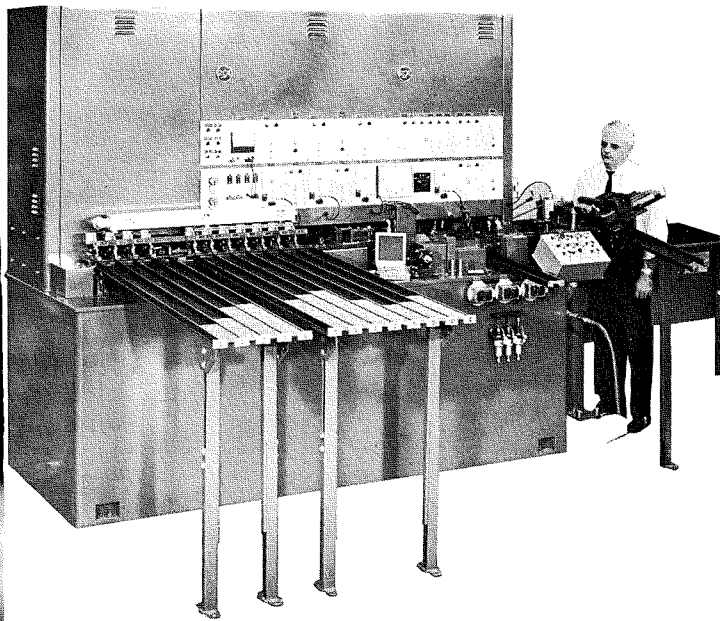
This automatic gaging system inspects 4000 automotive piston (wrist) pins per hour. Parts, which are fed in a single-line, end-to-end orientation, are inspected for length, out-of-round, taper, and size. The part is rotated during the final inspection.
